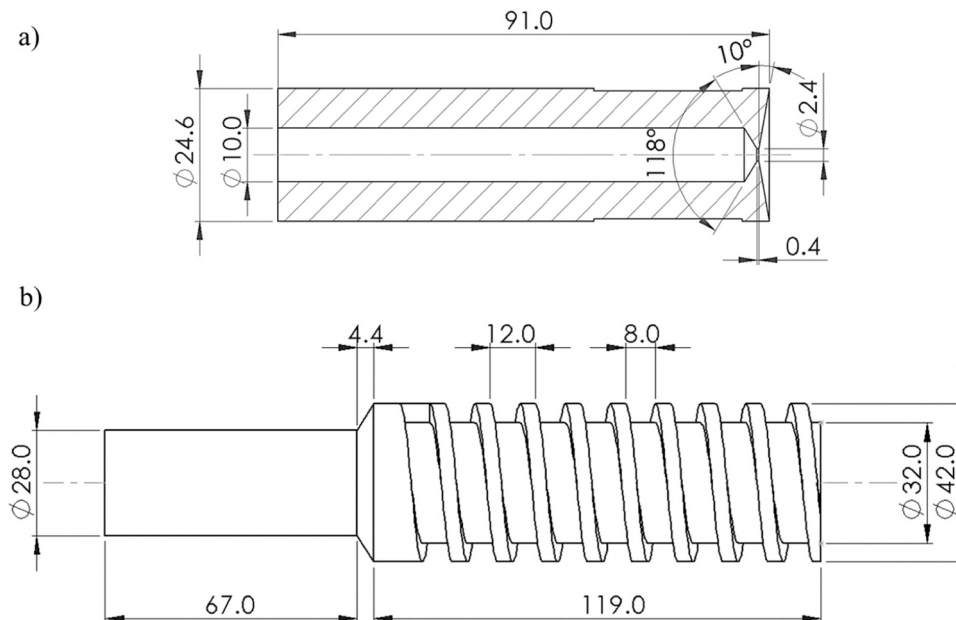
(a) Geometry dimensions of rotating tool and (b) geometry dimensions of redesigned cochlea.
